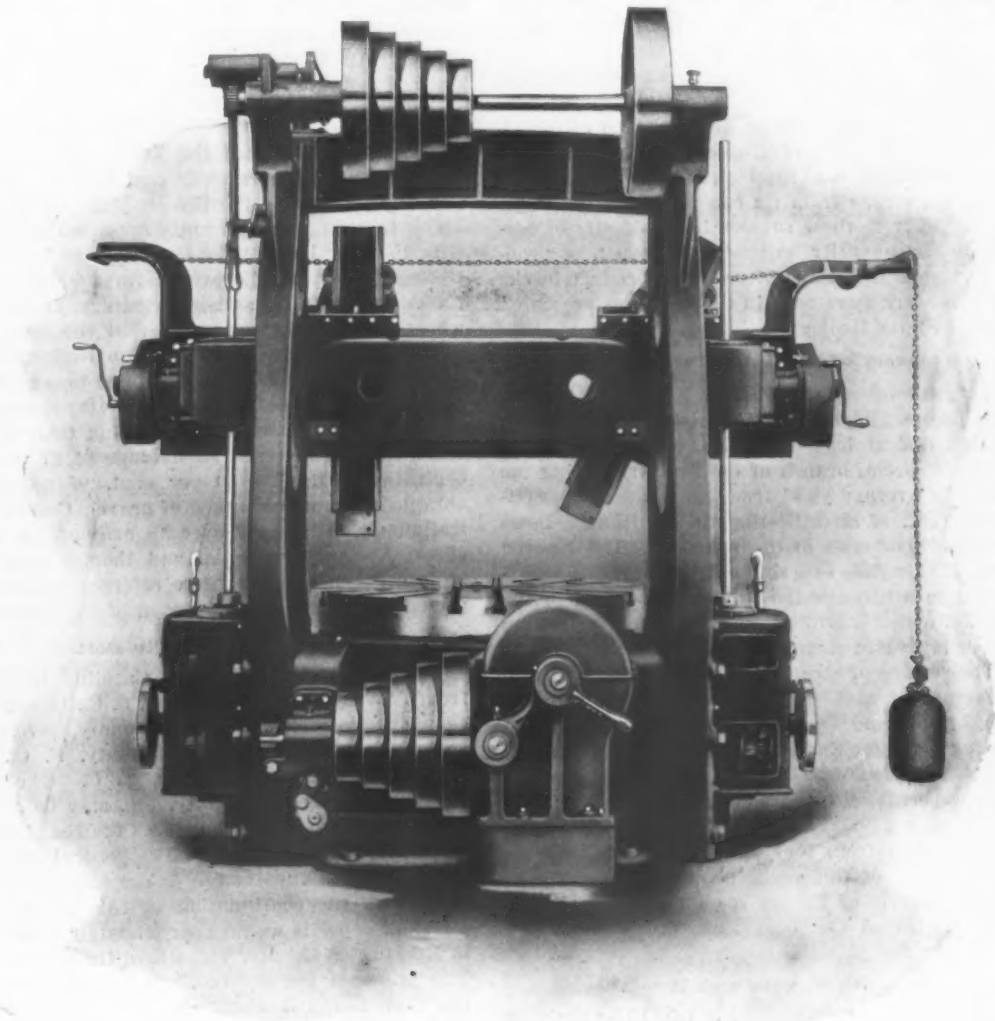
Rear View of the Colburn Boring and Turning Mill.
